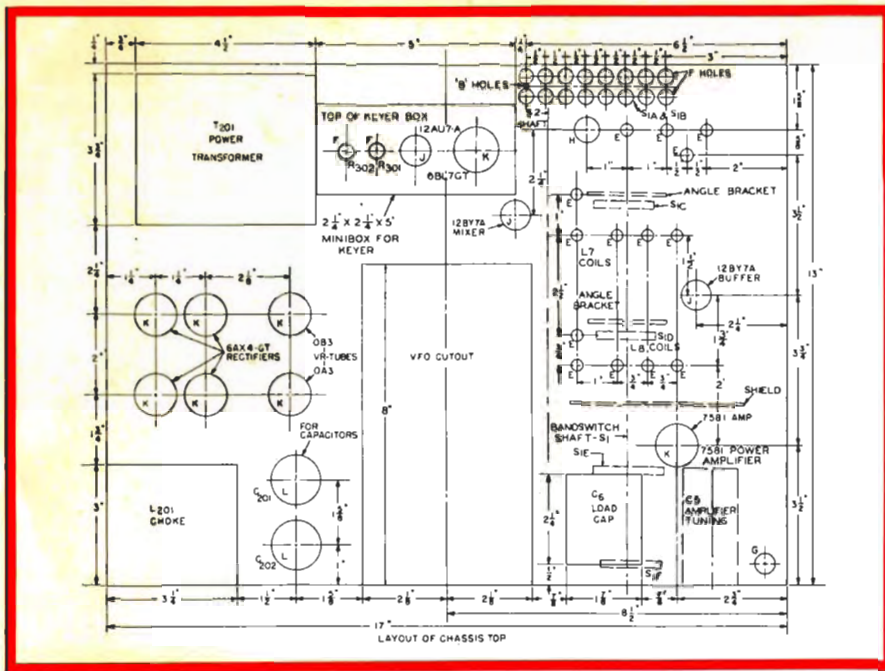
CHASSIS DRILLING DIAGRAM for the heterodyne exciter. Hole locations and sizes are those for the parts used in W2FBS's model. All parts should be carefully checked to determine hole sizes and locations actually required before drilling the chassis. Approximate locations for the angle brackets for the bandswitch, and interstage shield are illustrated. Outlines showing the space allotted to the power transformer (T₂₀₁), filter choke (L₂₀₁), and packaged VFO unit are approximate and indicate the space needed for the largest such parts apt to be used in constructing this exciter unit.
